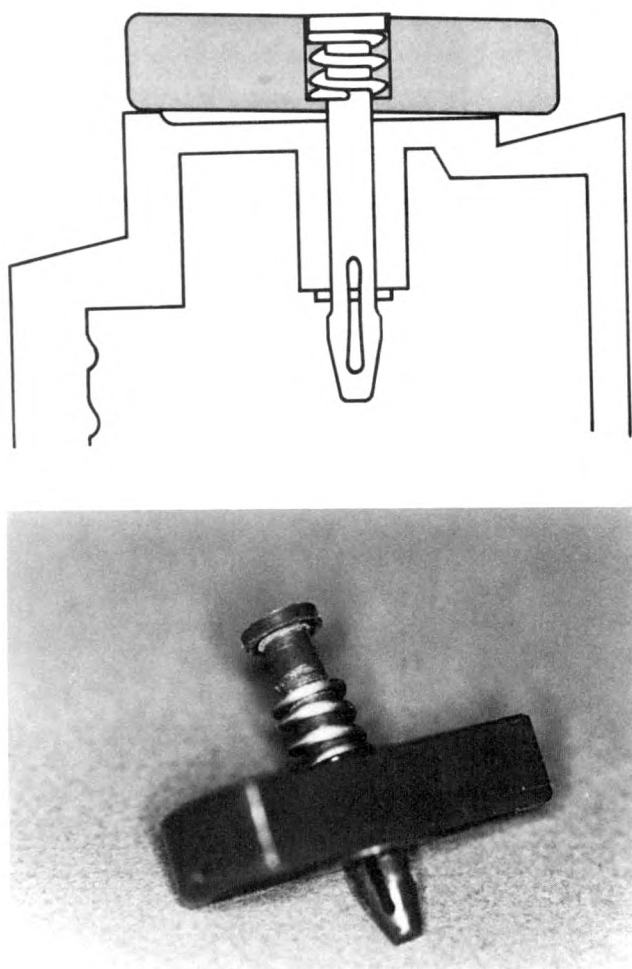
Top, Cut-away drawing of the lid clip assembly. Bottom, Position of the spring in the lid clip assembly.
